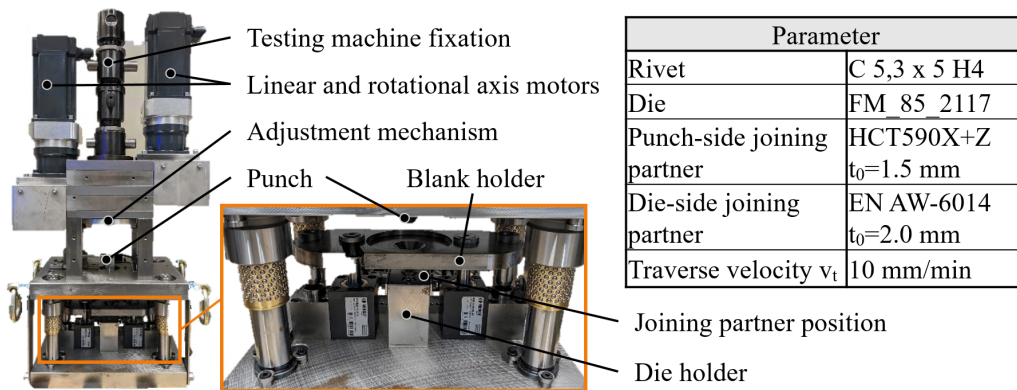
Semi-tubular self-piercing riveting tool with detail views and tool parameters.
